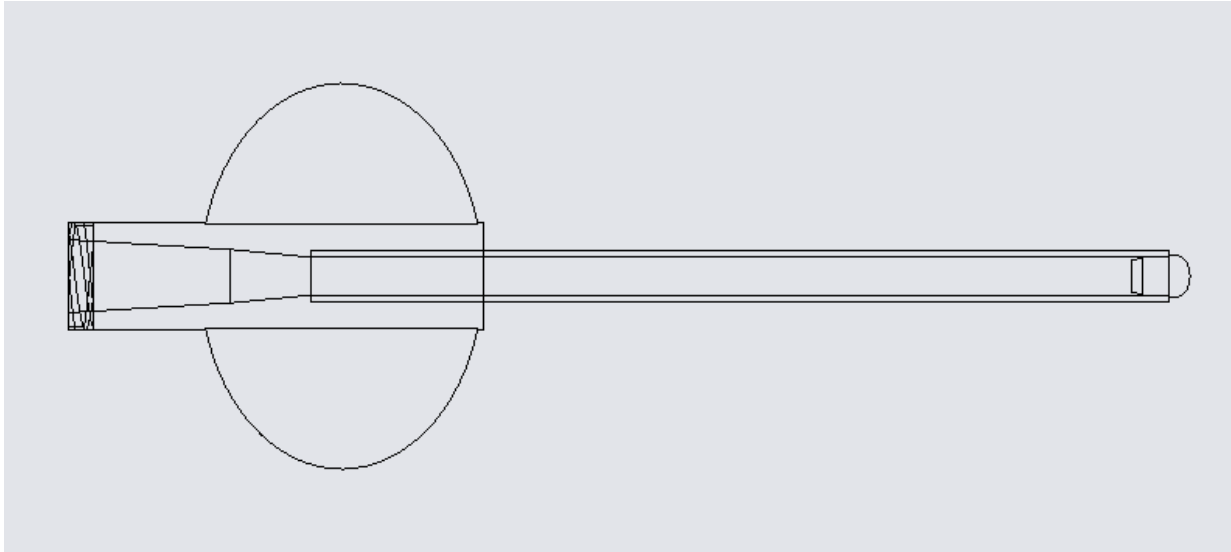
The wireframe view of the CAD model of the final prototype. Here you can plainly see how the taper enters the inner diameter of the catheter. Additionally, the tip modification is detailed at the distal end.
